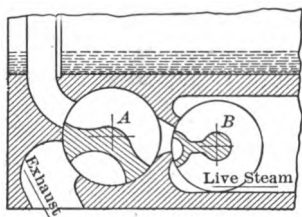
WHEELOCK ROTARY CUT-OFF VALVE
